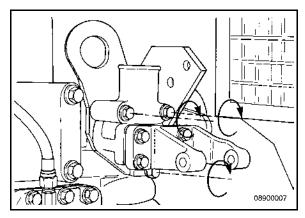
INSTALL THE THERMOSTAT, THERMOSTAT SEAL, THERMOSTAT HOUSING, GASKET, LIFTING BRACKET, AND THREE CAPSCREWS
